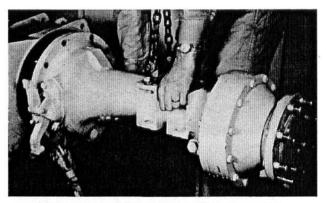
L.H. AXLE HOUSING ASSEMBLY REMOVAL OR INSTALLATION
